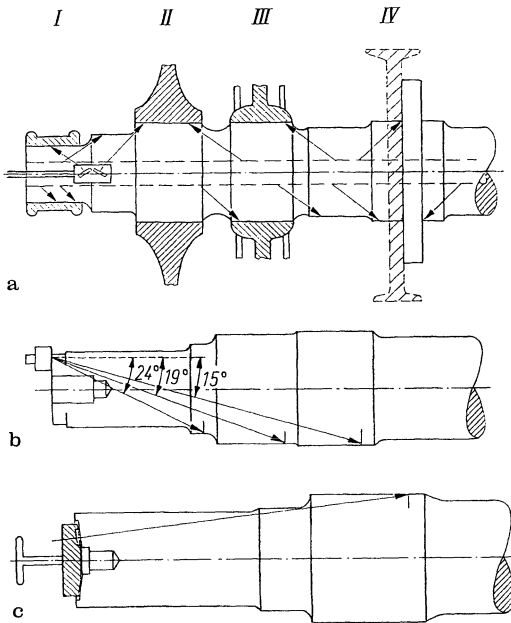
Axle tests with special probes. a Hollow axle with several cross-sectional changes (I internal ring of the roller bearing, II wheel disc, III brake disc, IV drive); b axle for American Diesel locomotive, probes for longitudinal waves at 15°, 19° and 24° according to Sperry; c axle with external bearing (schematic) and conically machined end face using fitted longitudinal-wave probe (Swiss Federal Railways)
